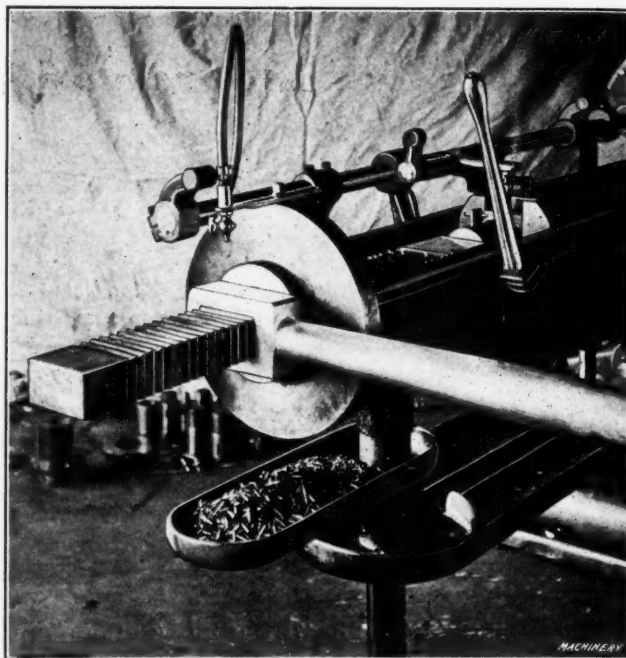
Broaching Connecting-rod End in Lapointe Machine
